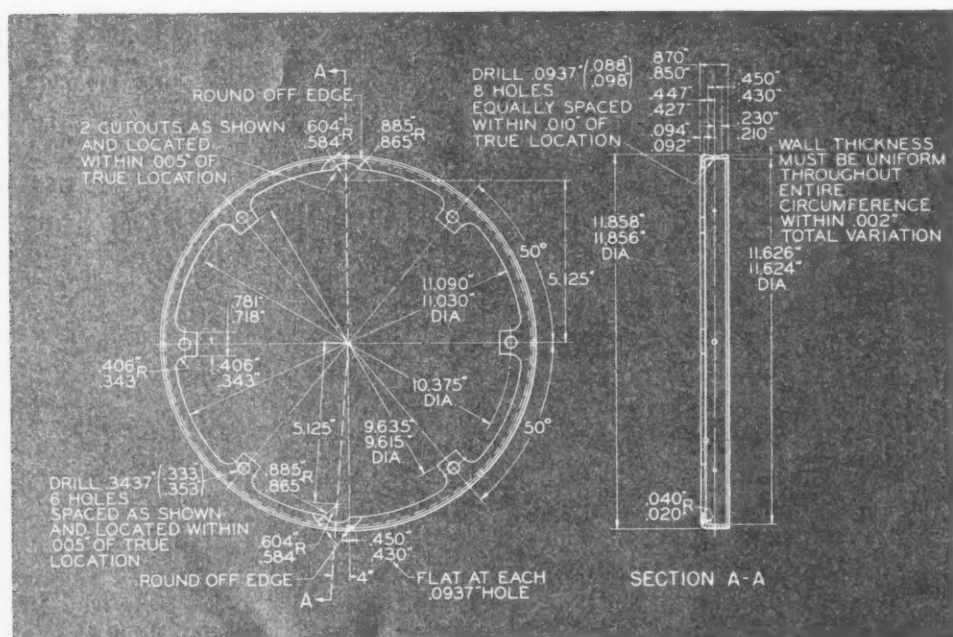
Bronze-alloy cam bearing for the 2400-H.P. Pratt & Whitney "Double Wasp" engine
